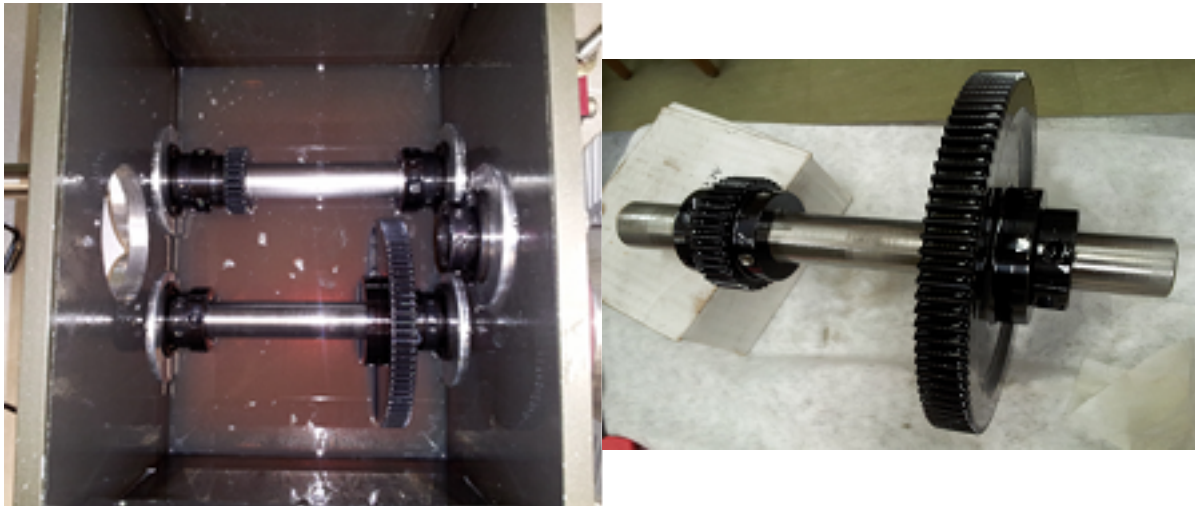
Intermediate Shaft Removed to Replace the Gear
